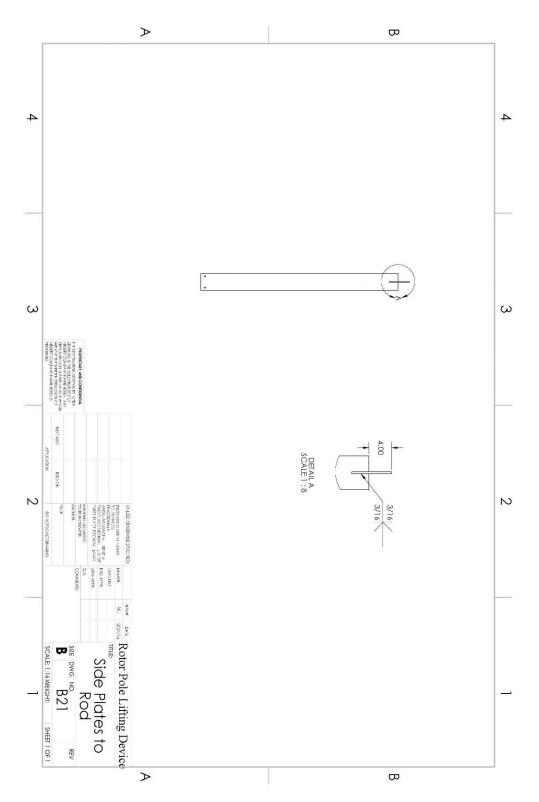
DRAWING OF SIDE PLATE TO ROD WELDS
